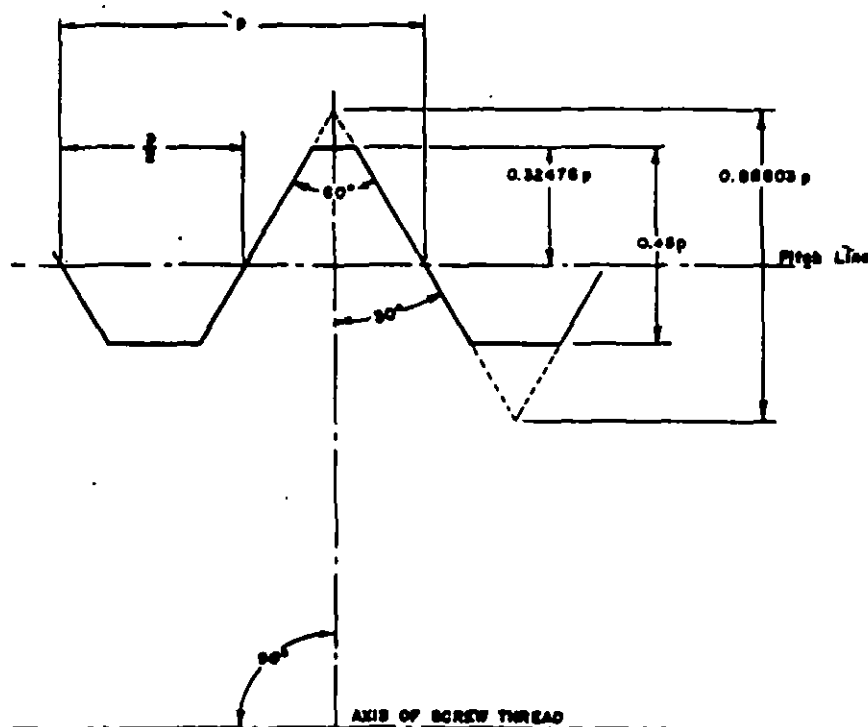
Basic thread form, Unified Miniature threads, UNM.
